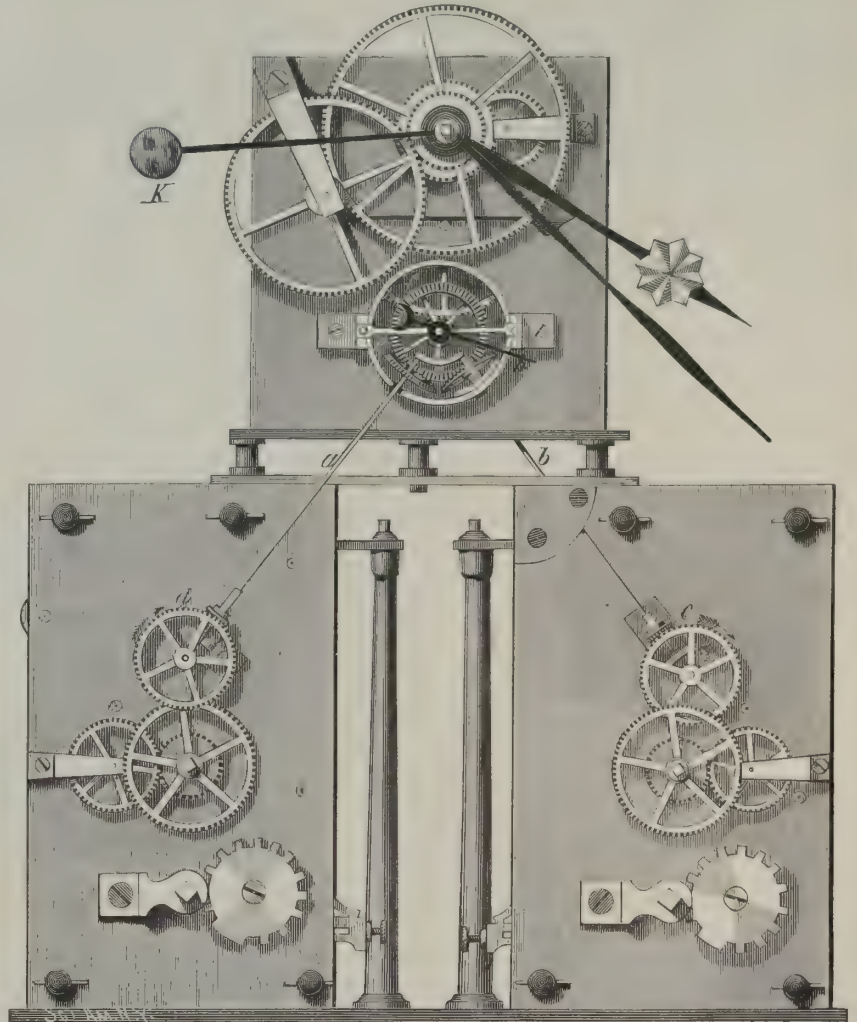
VIEW OF WORKS WITH DIALS REMOVED.
